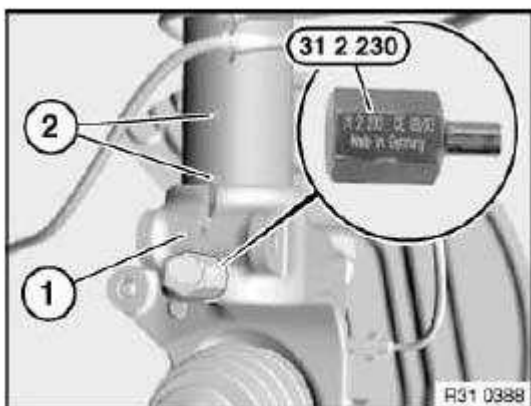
Special Tool (31 2 230) And Swivel Bearing
